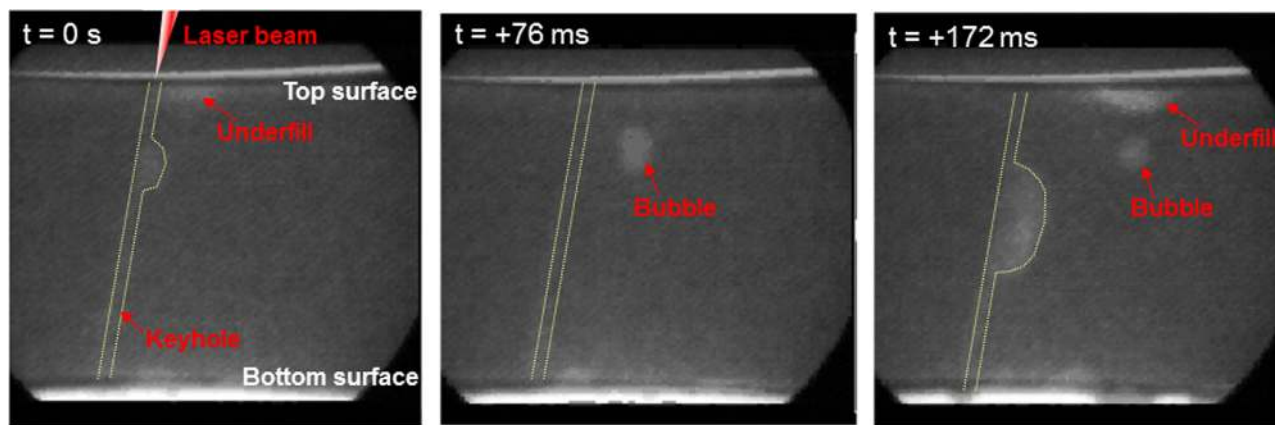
In situ* X-ray transmission images during high-power fiber laser welding with optics system A showing unstable keyhole behavior and bubble formation.
